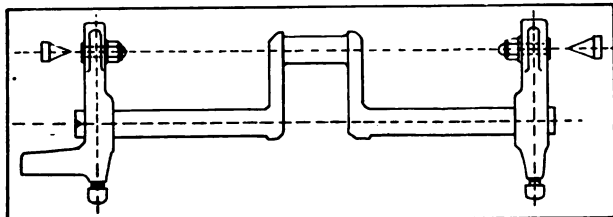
Using Combination Lathe Dogs for Turning up Crankshaft.
